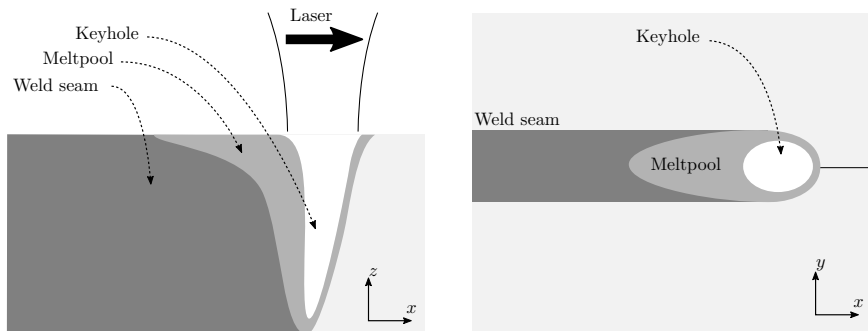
Schematic laser welding process, side and top views.
